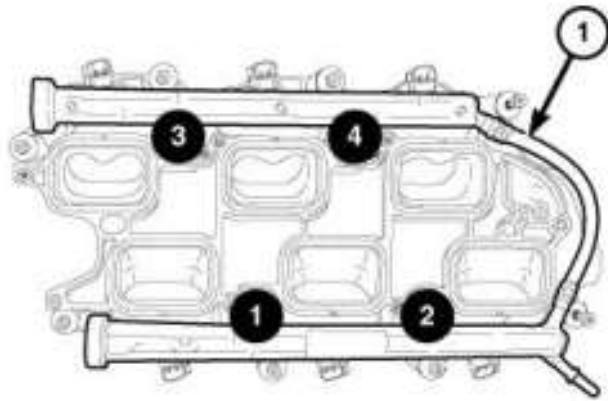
Lower Intake Manifold To Cylinder Head Seals
